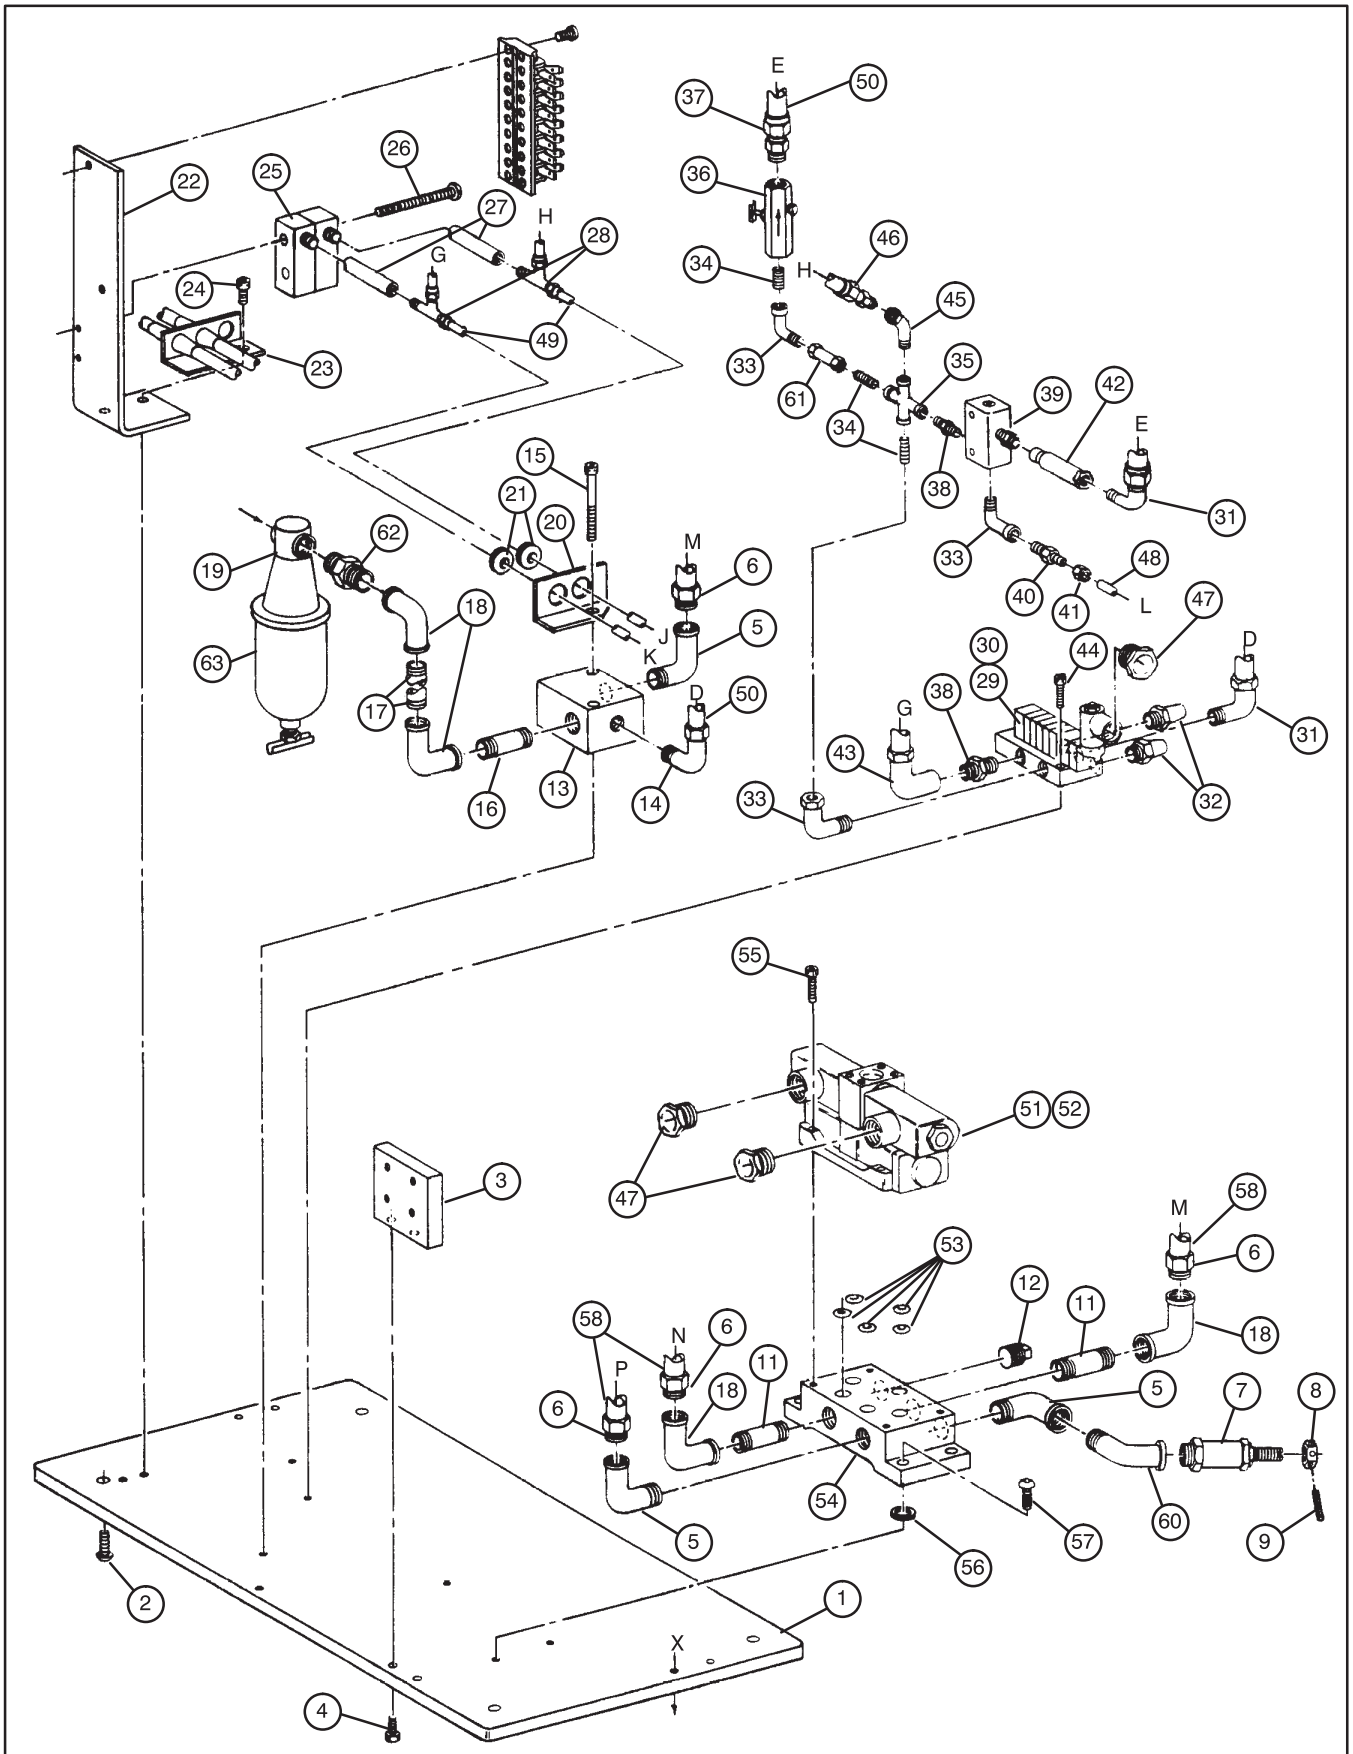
Exploded View, Valve Mounting Plate Subassembly (Sheet 3 of 3)
